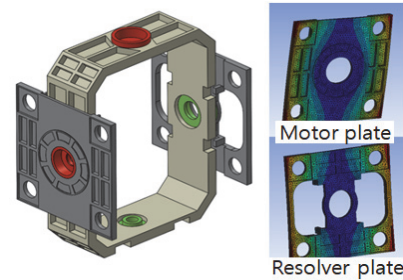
Structural analysis of isolator plate structures after reinforcement
